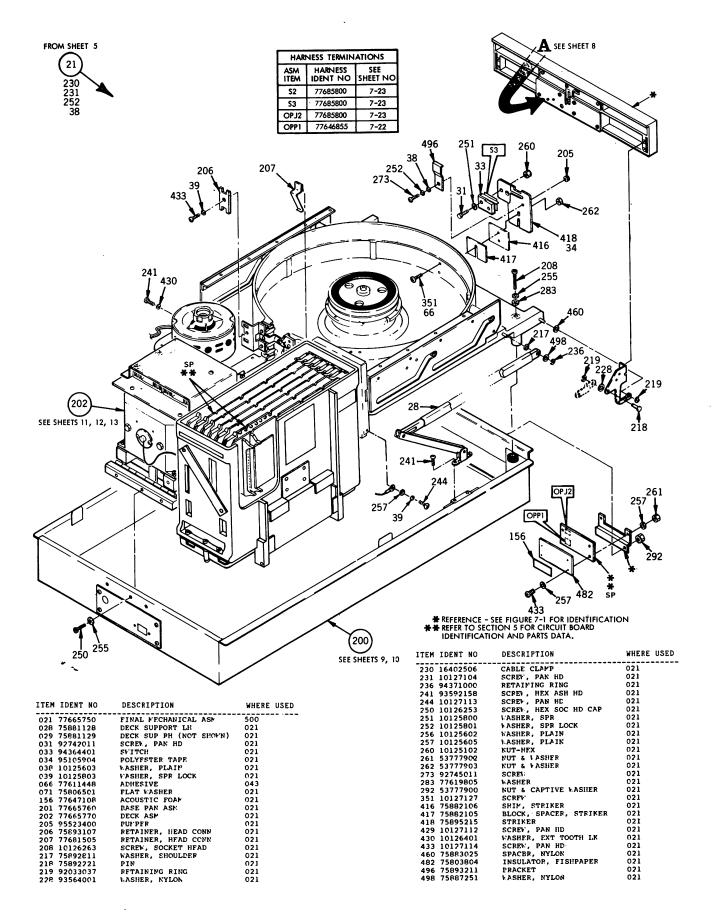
FINAL MECHANICAL ASM (SHEET 1 of 3)
